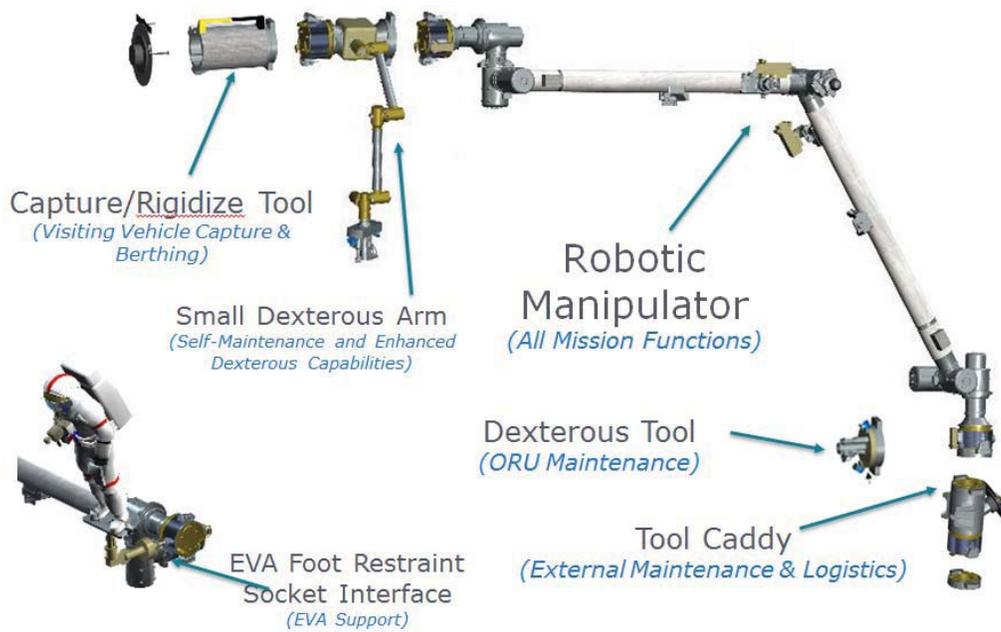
CONCEPT OF ROBOTIC SYSTEM WITH TOOL CADDY, CAPTURE TOOL, DEXTEROUS TOOL, AND EVA SOCKET INTERFACE
